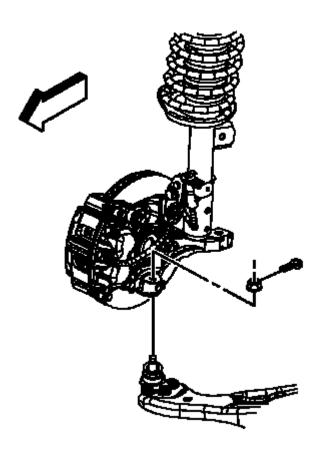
View Of Lower Ball Joint At Steering Knuckle Courtesy of GENERAL MOTORS COMPANY
